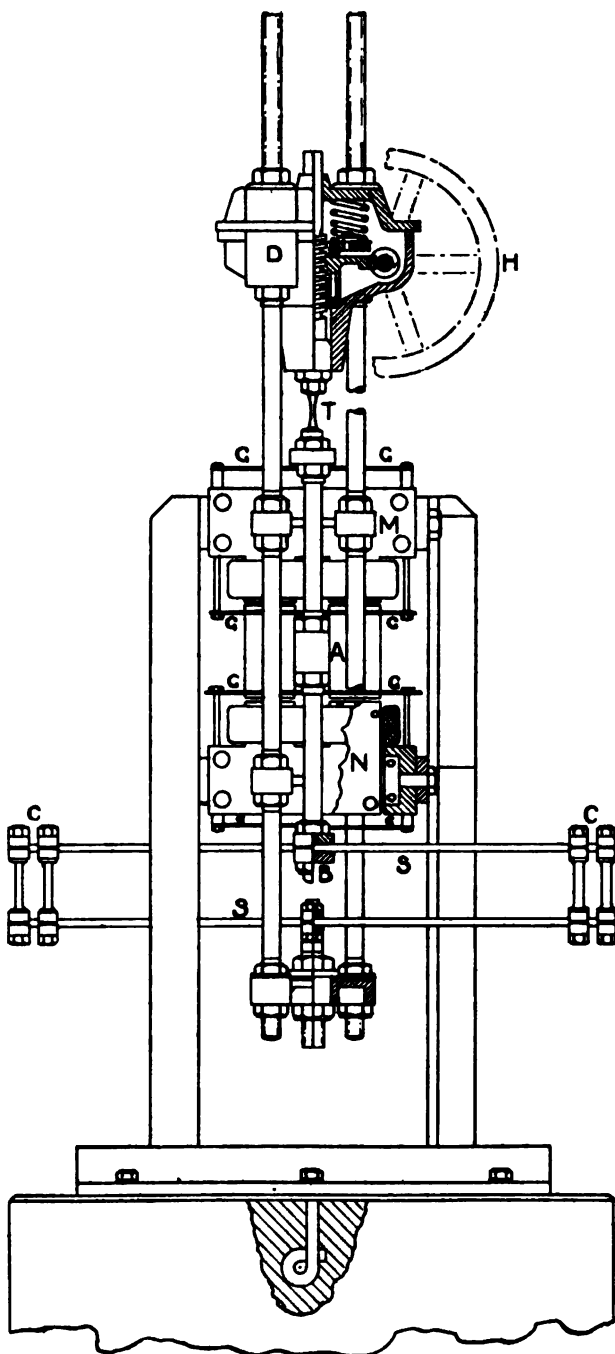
SECTIONAL ELEVATION OF HAIGH ALTERNATING-STRESS TESTING MACHINE.
